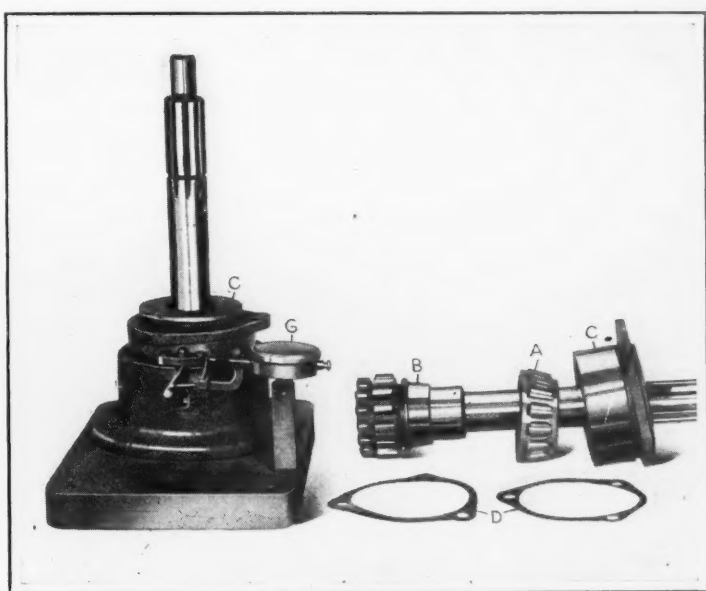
Device used for determining Number of Shims required in assembling Tapered Roller Bearing on Clutch Shaft
